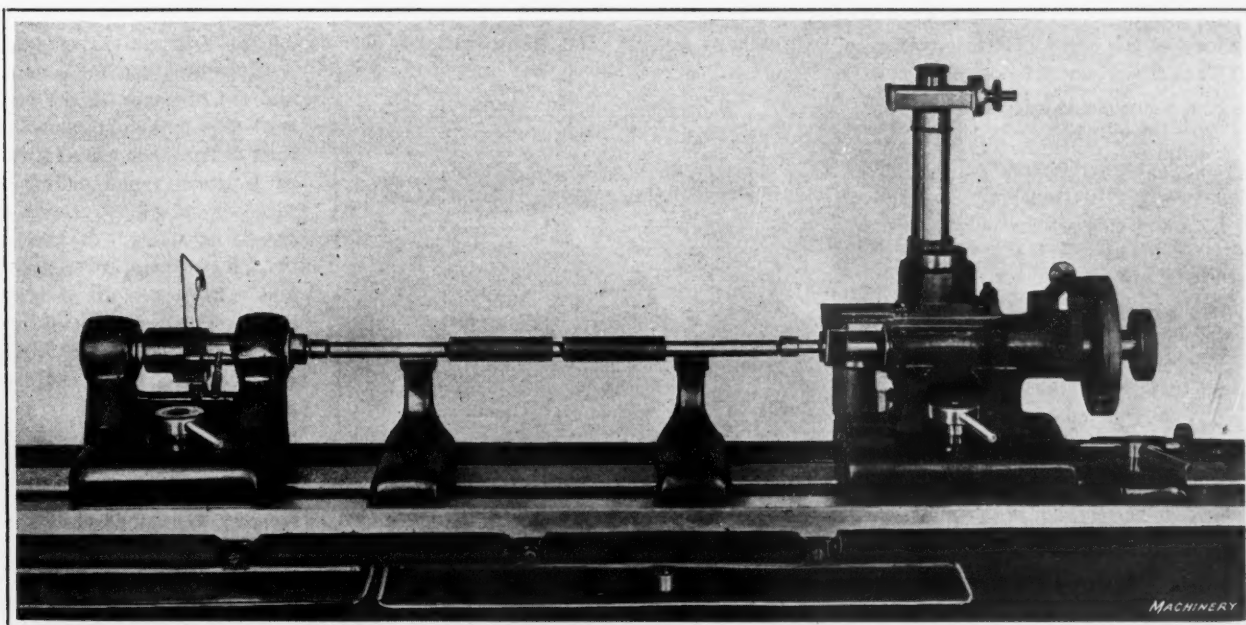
Pratt & Whitney Measuring Machine in which Ball-contact Thimbles are used
